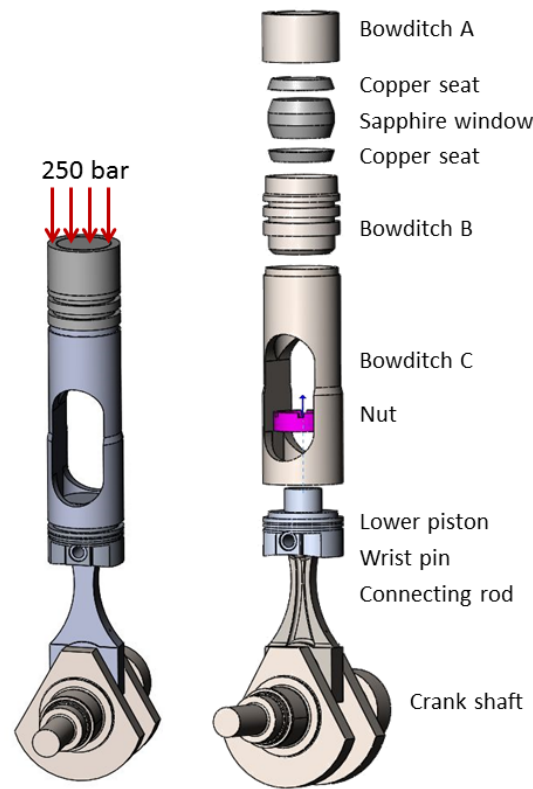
A view of assembled and exploded bowditch components plus the location and orientation of 250 bar loading
